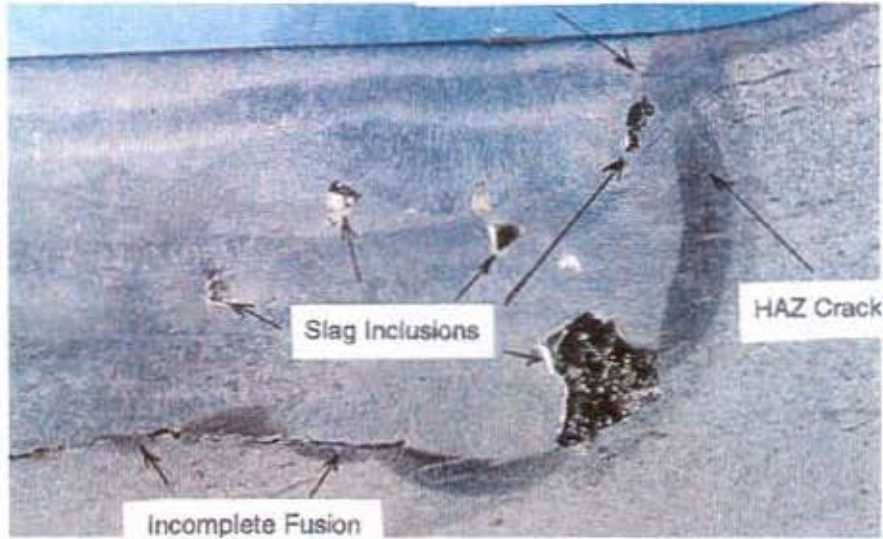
Numerous weld defects at keyway 3A after metallographic cross-sectioning. (ATLSS)
